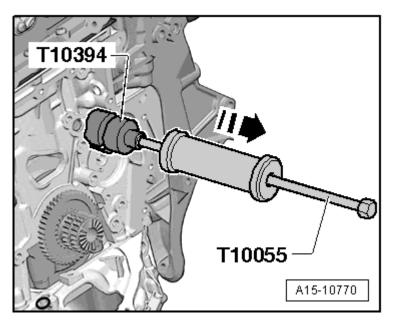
Identifying Installation And Operation Of Puller - T10055-Courtesy of VOLKSWAGEN UNITED STATES, INC.
